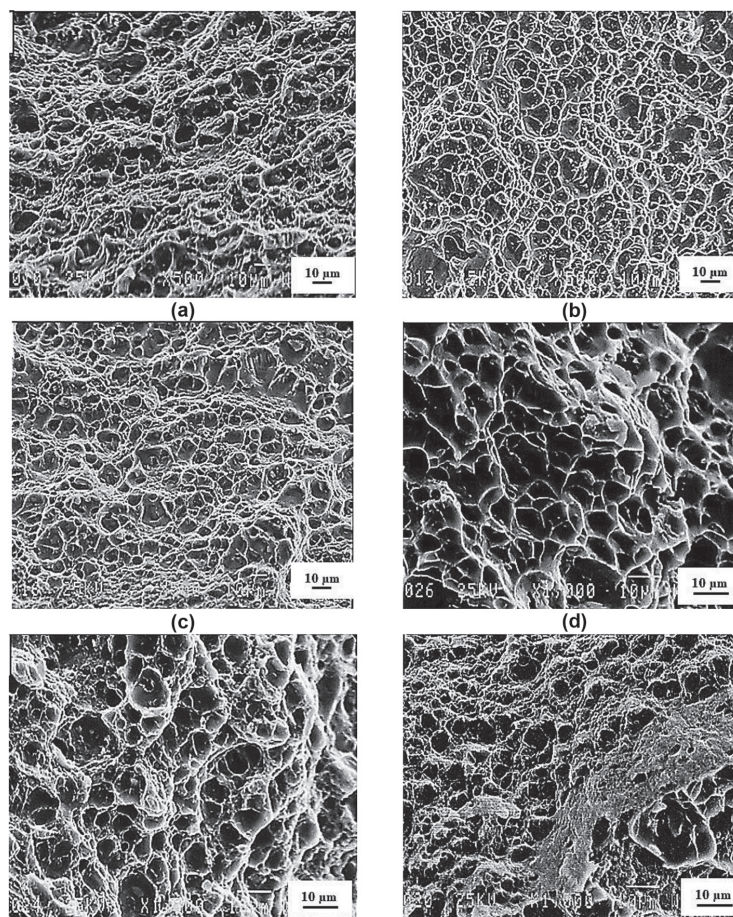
SEM micrographs of impact test fracture surfaces. (a) Base', (b) 'simple weld', (c) 'simple weld + FSP', (d) '0.75 + FSP', e '1.5 + FSP', and (f) '2.5 + FSP'
